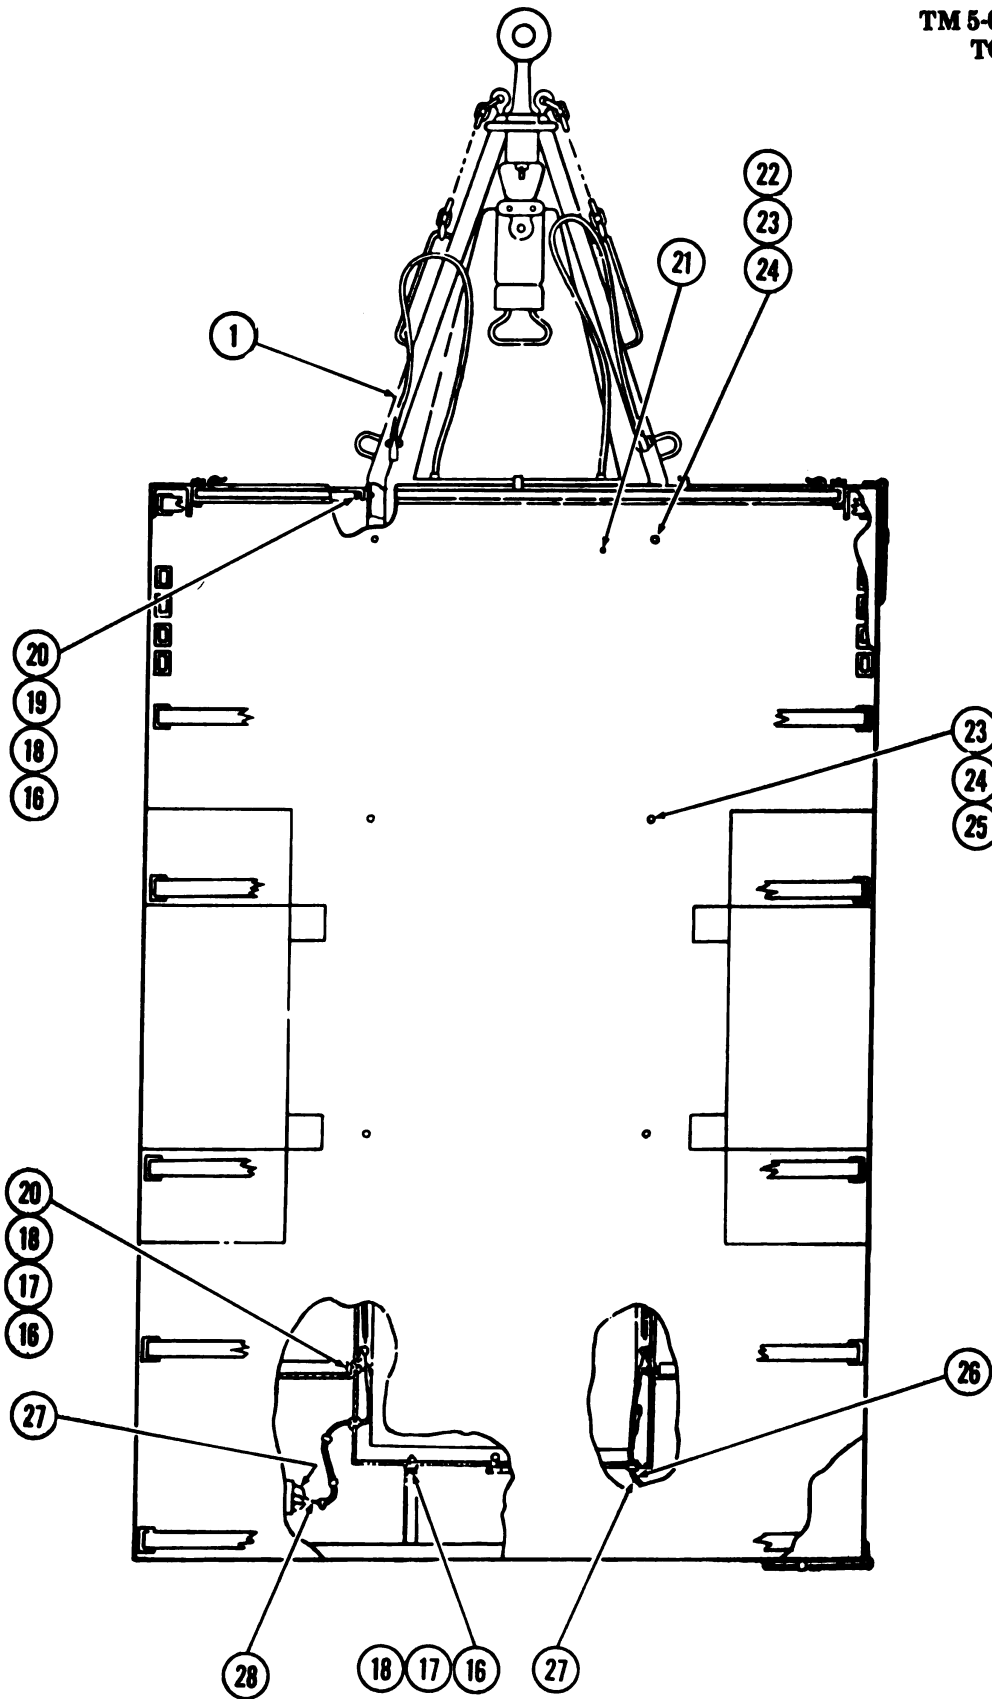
Trailer, Side, Top and Rear Views (Sheet 2 of 3)
